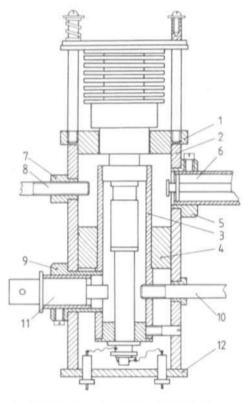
Main components cross-sectional drawing of 6 cm band power amplifier
